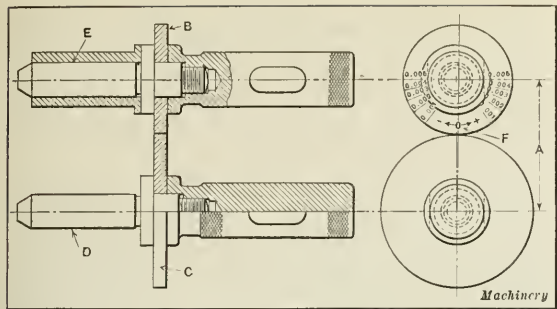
Special Plug Gage for gaging Gear Center Distances
